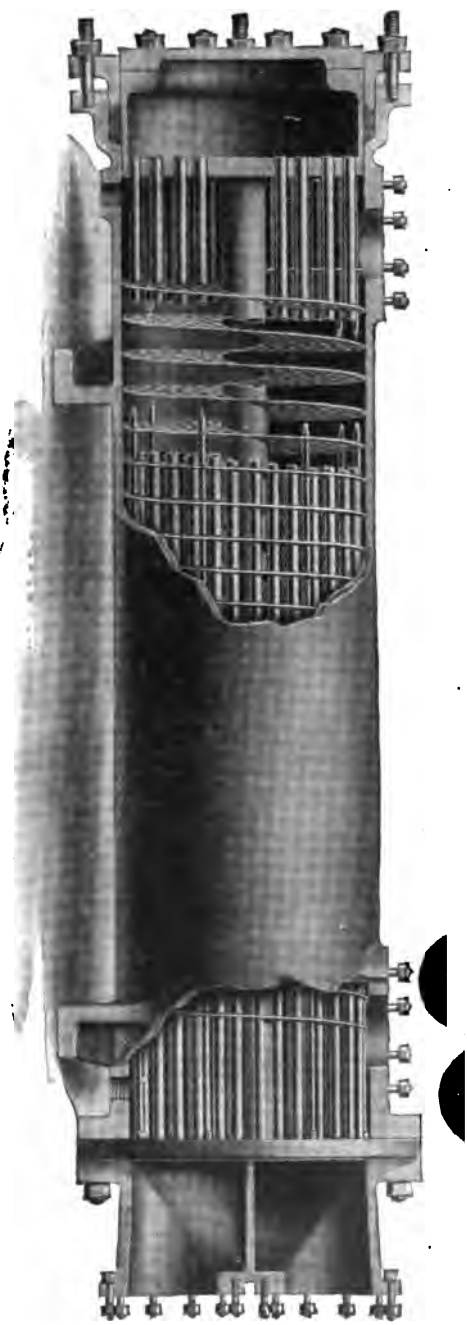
Sec. 8a.—Multiwhirl oil cooler.
